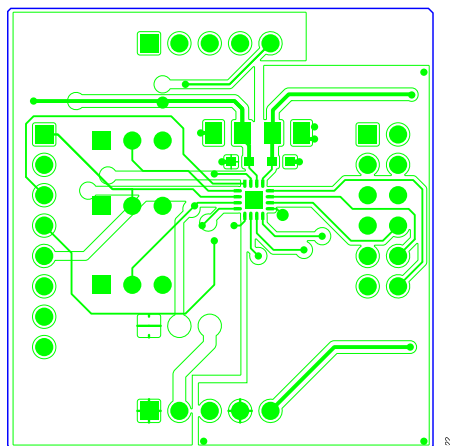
Component Placement Drawing of EVAL-AD5142A-2DBZ
